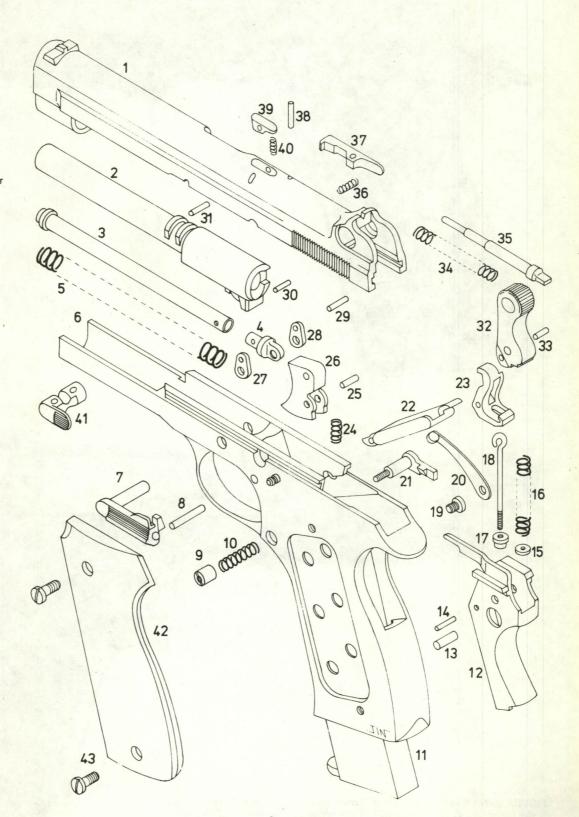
Exploded view of the French Modele 1935 A pistol. (Jimbo)
